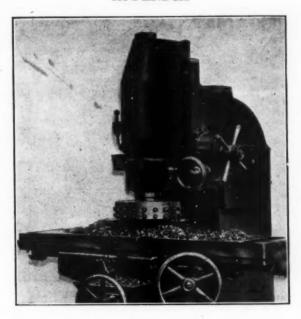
High-Power Face Mill of Early Construction, Milling Machine-Steel Test Blocks. Chips Resemble Planer Chips
